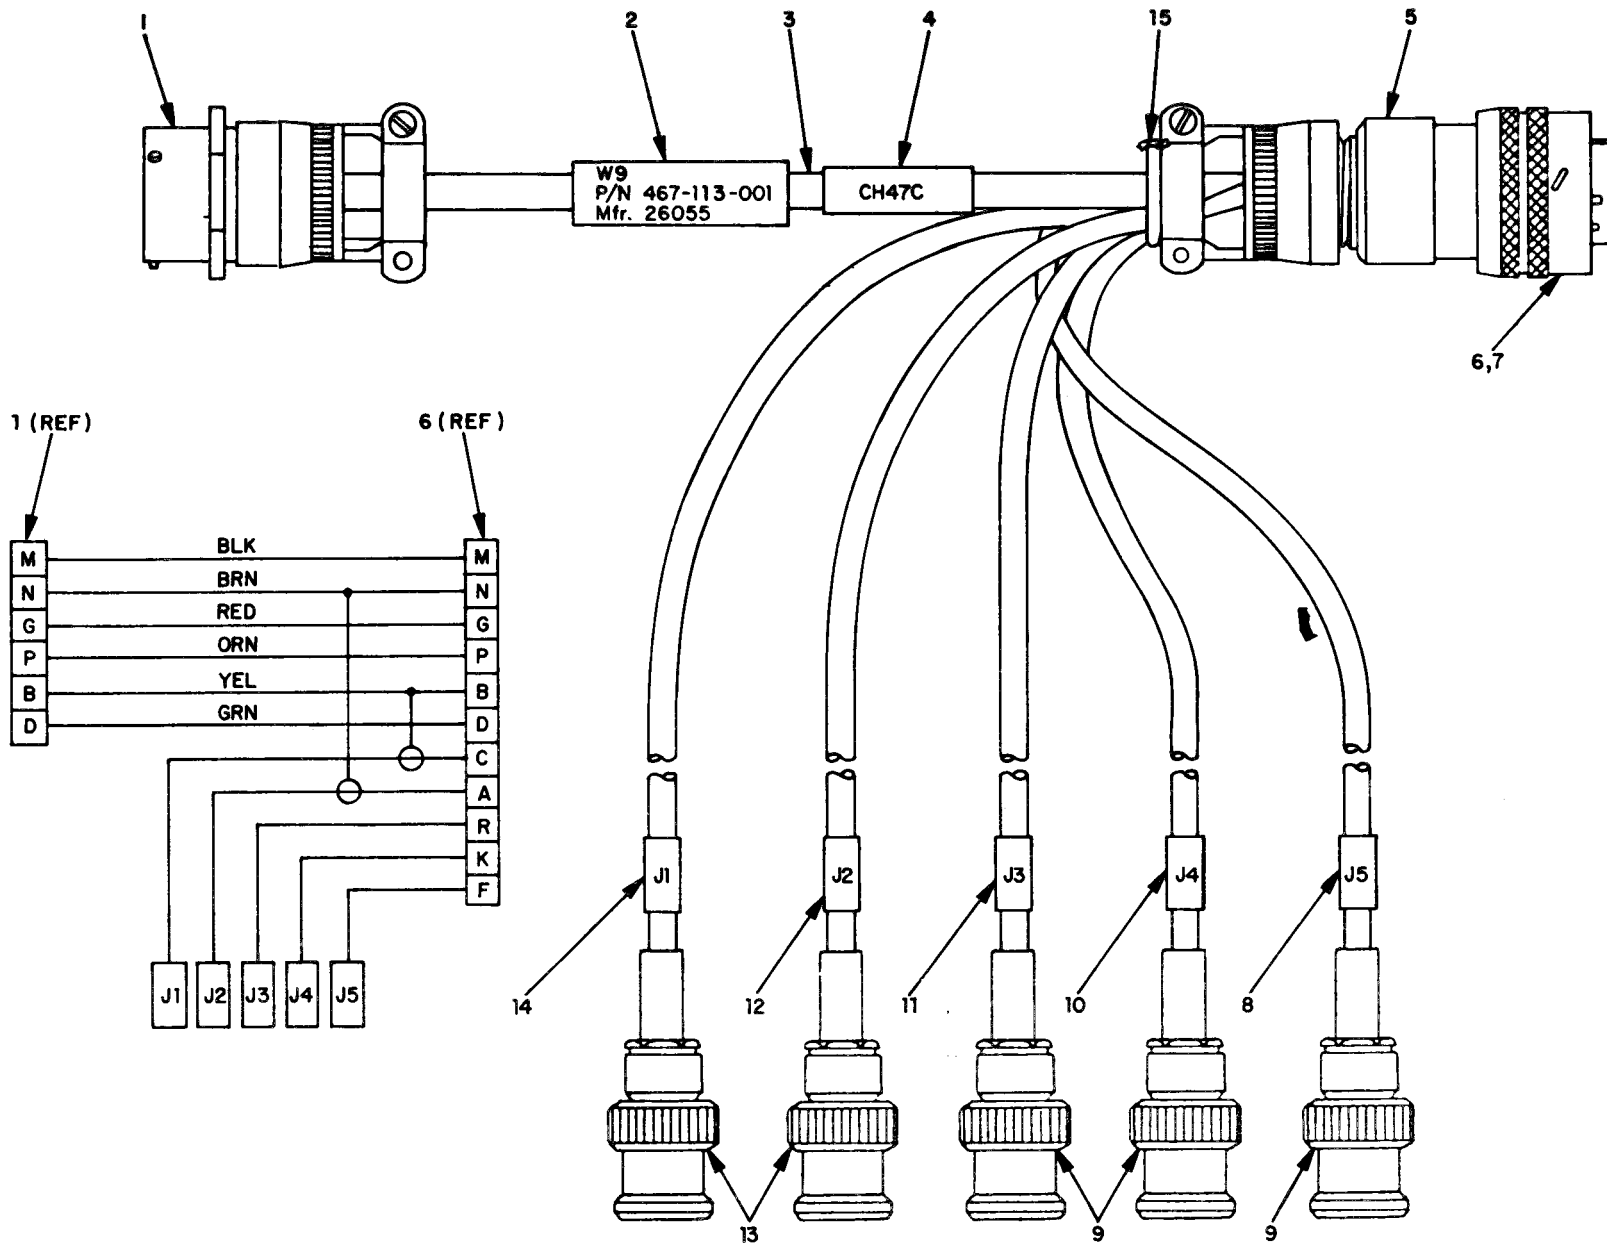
Adapter Cable Assembly W9 (467-113-001).
